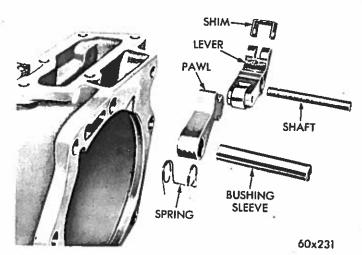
Parking Lock Lever, Pawl and Spring (Exploded View)
